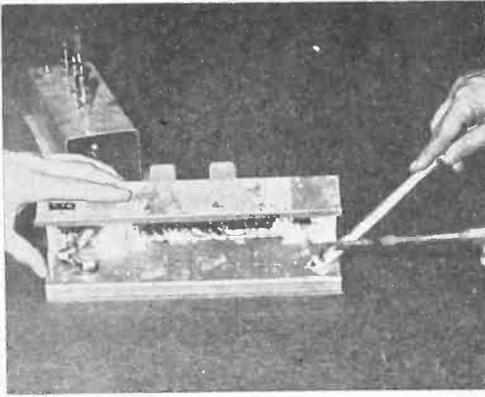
Attaching Chemalloy solder to aluminum surface of a 452 megacycle fail-safe radio receiver unit. Soft solder can then be applied to Chemalloy.
